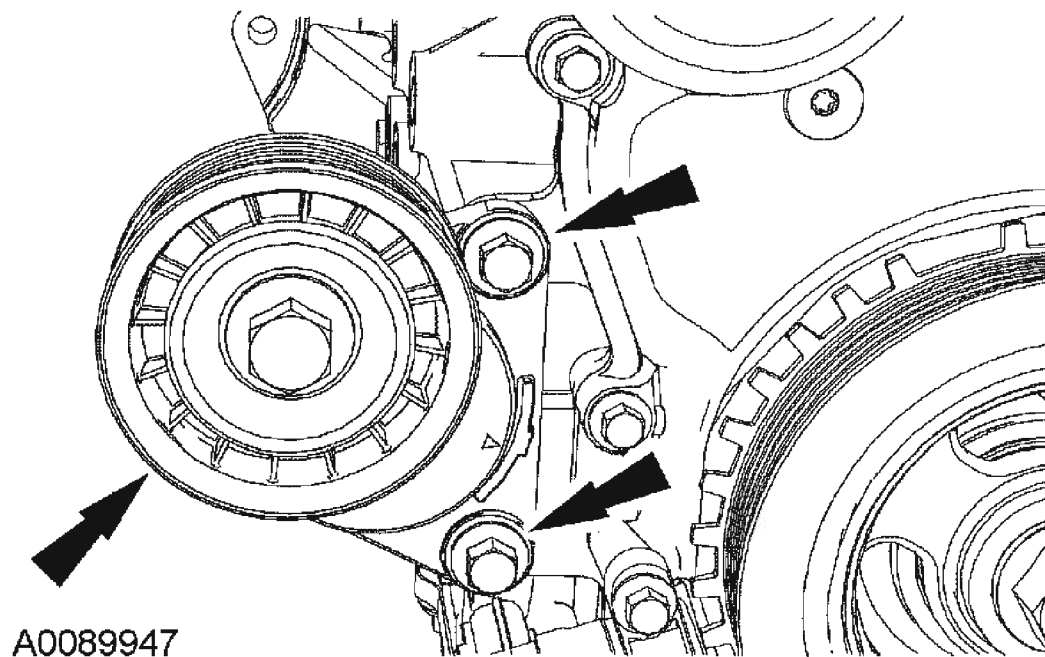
Removing Bolts And Accessory Drive Belt Tensioner
